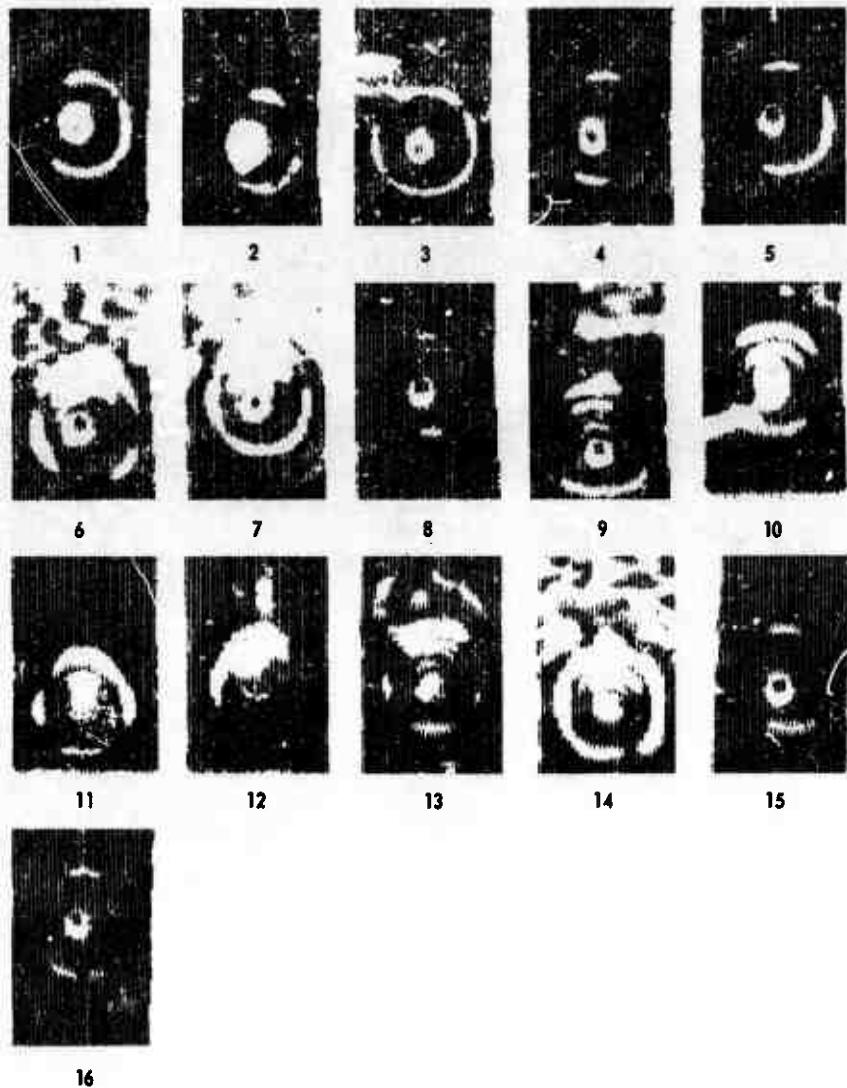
C-Scan Record of Series 9 Welds.
